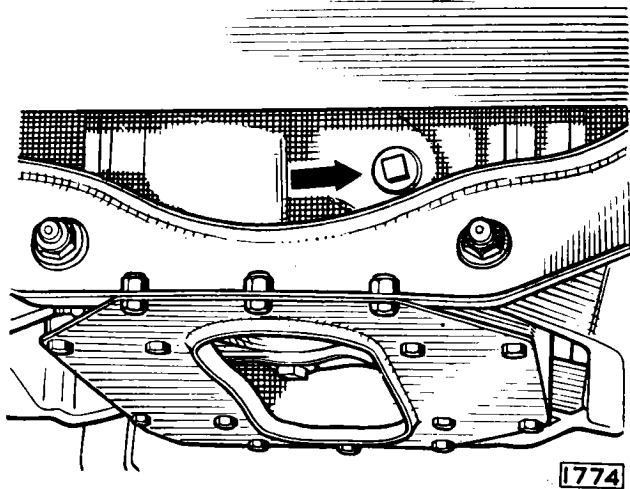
Rear axle level and filler (the exhaust pipes have been removed for illustrative purposes)
